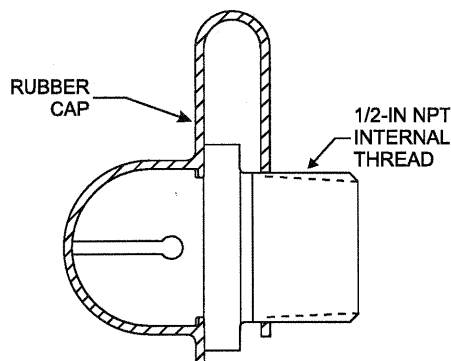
Tankside Nozzle (P/N WK-259072-001)
